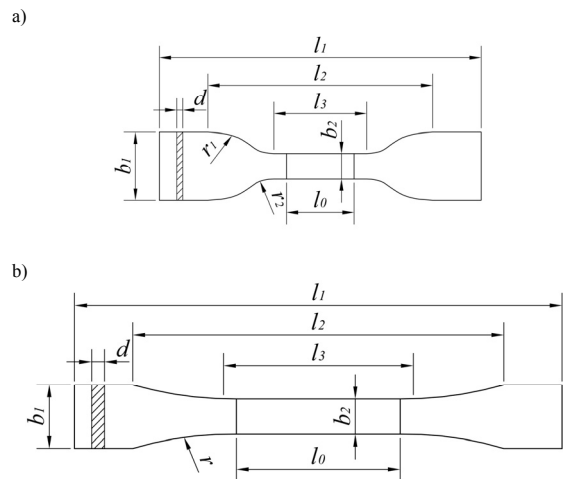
Shape and dimensions of the test specimens: a) type 1, b) type 2
